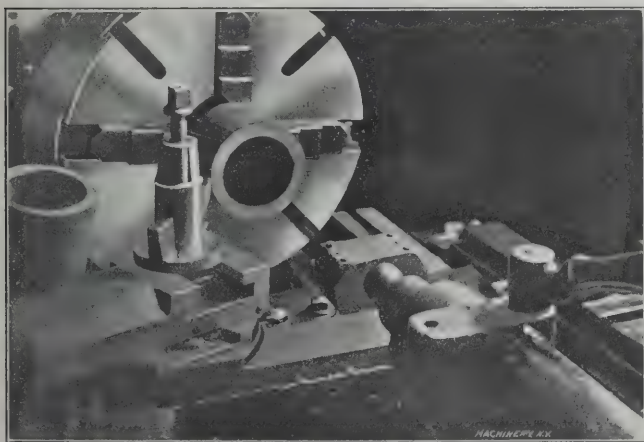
Facing the End, breaking the Inside Edge and boring out the Piston
